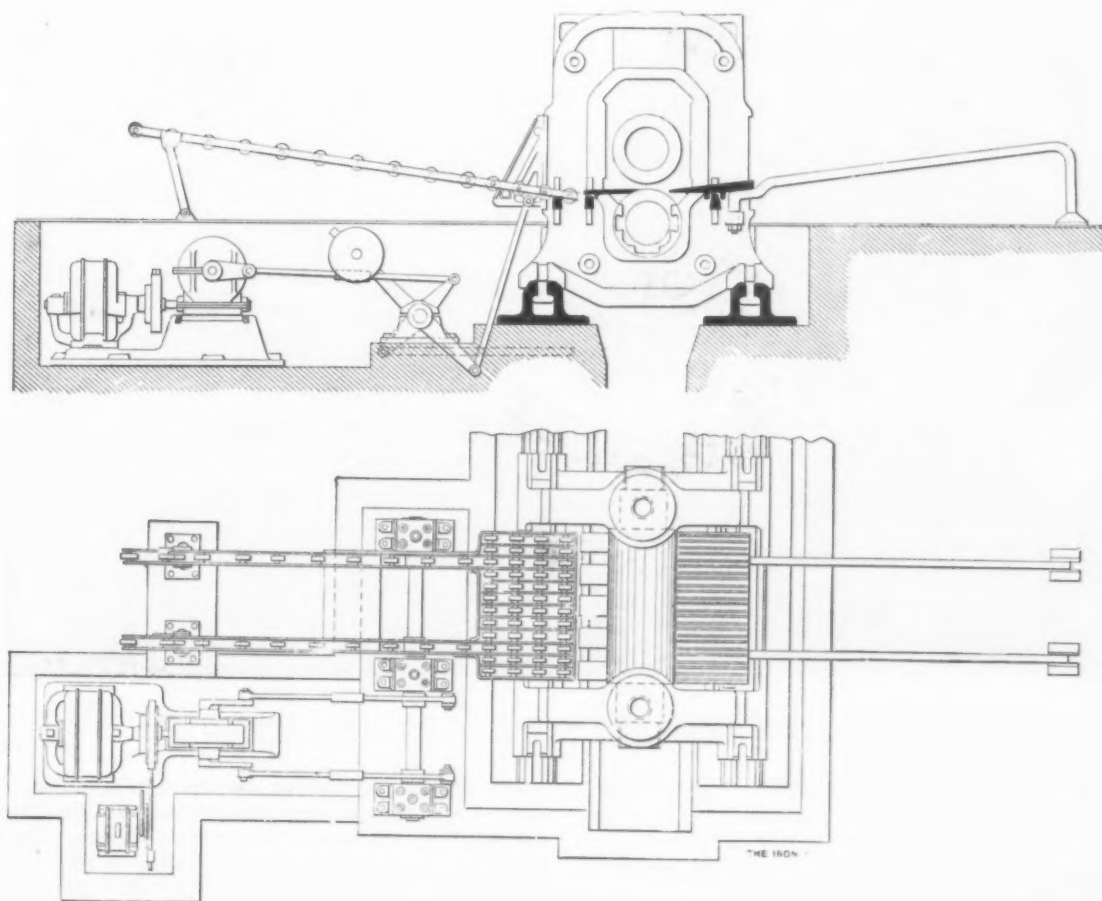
An Electrically Driven Lifting Table with a Lever Arrangement Similar to the One in Fig. 1.
